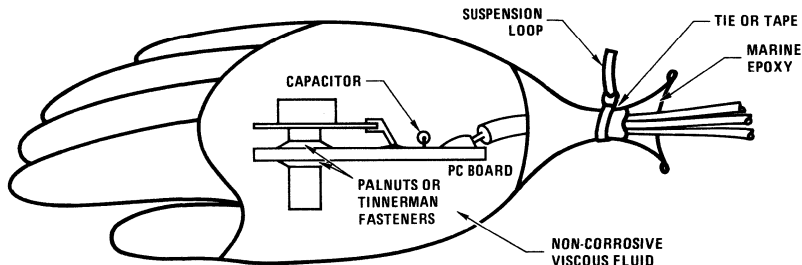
LX16XX Installed in Rubber Glove Assembly
